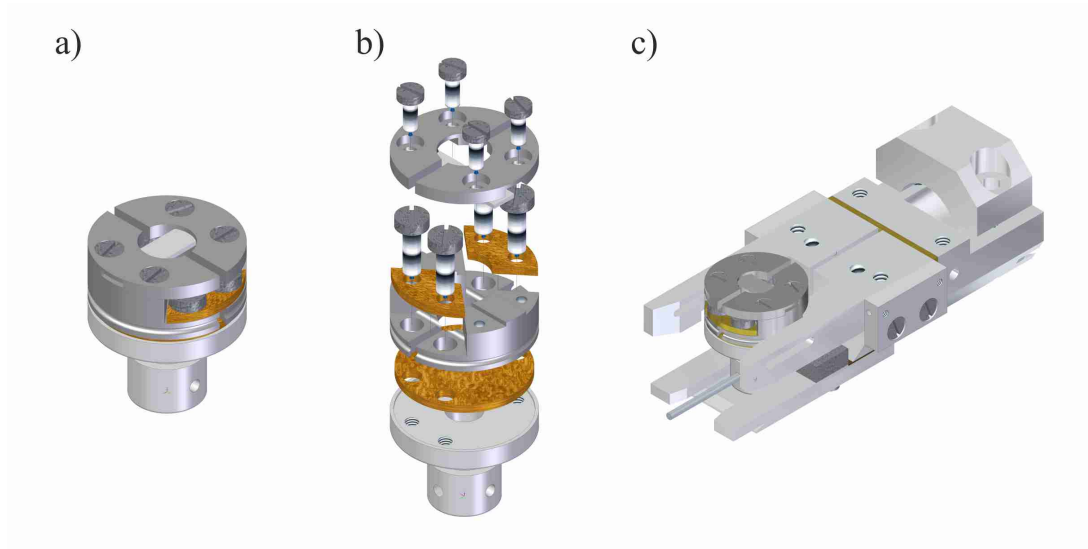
a) Rendering of the Si sample holder and in exploded view in b). c) Sample holder inserted into the heating stage. Ceramic parts are coloured gold.
